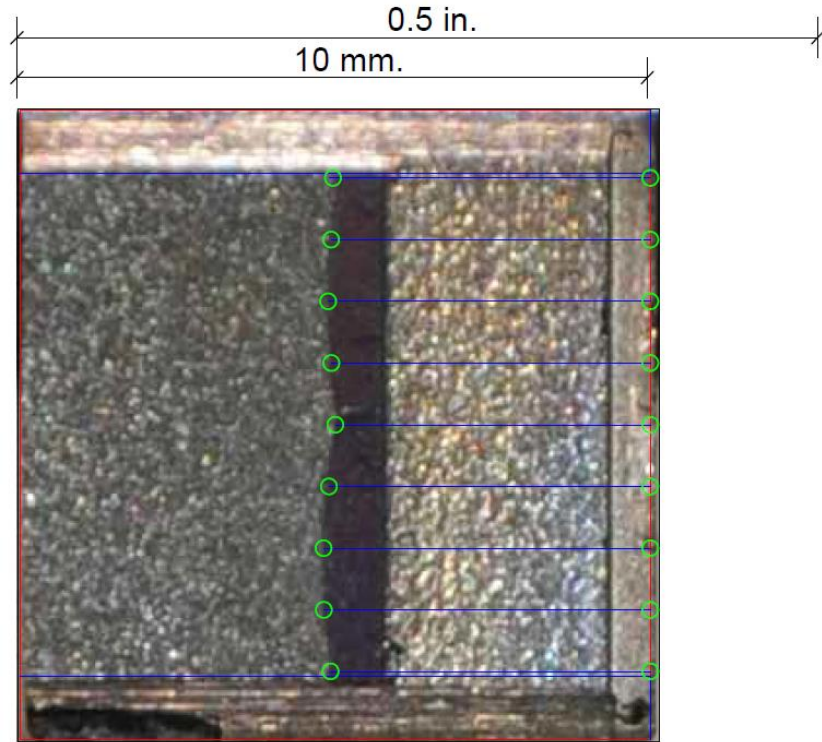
Specimen A4' Fracture Surface
